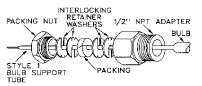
Part No. FTG13A-600R packing nut assembly. (Use with Style 1 bulb with support tube for direct immersion application.
